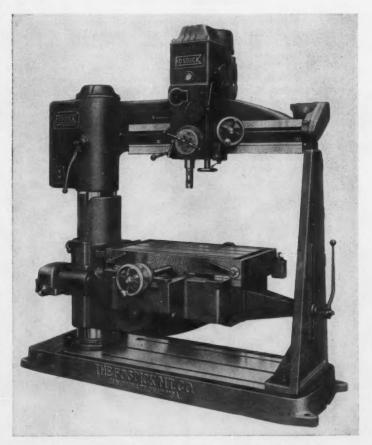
Radial drilling machine that has been equipped with a jig borer table for use as lay-out machine
